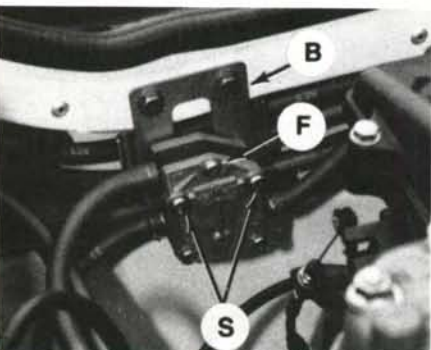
View identifies fuel pump assembly (F) used on all models. Remove two screws (S) to withdraw fuel pump assembly from mounting bracket (B).
